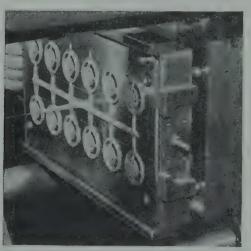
Injection molded guards for gas mask valves. (Courtesy of Ideal Plastics Corporation.)
